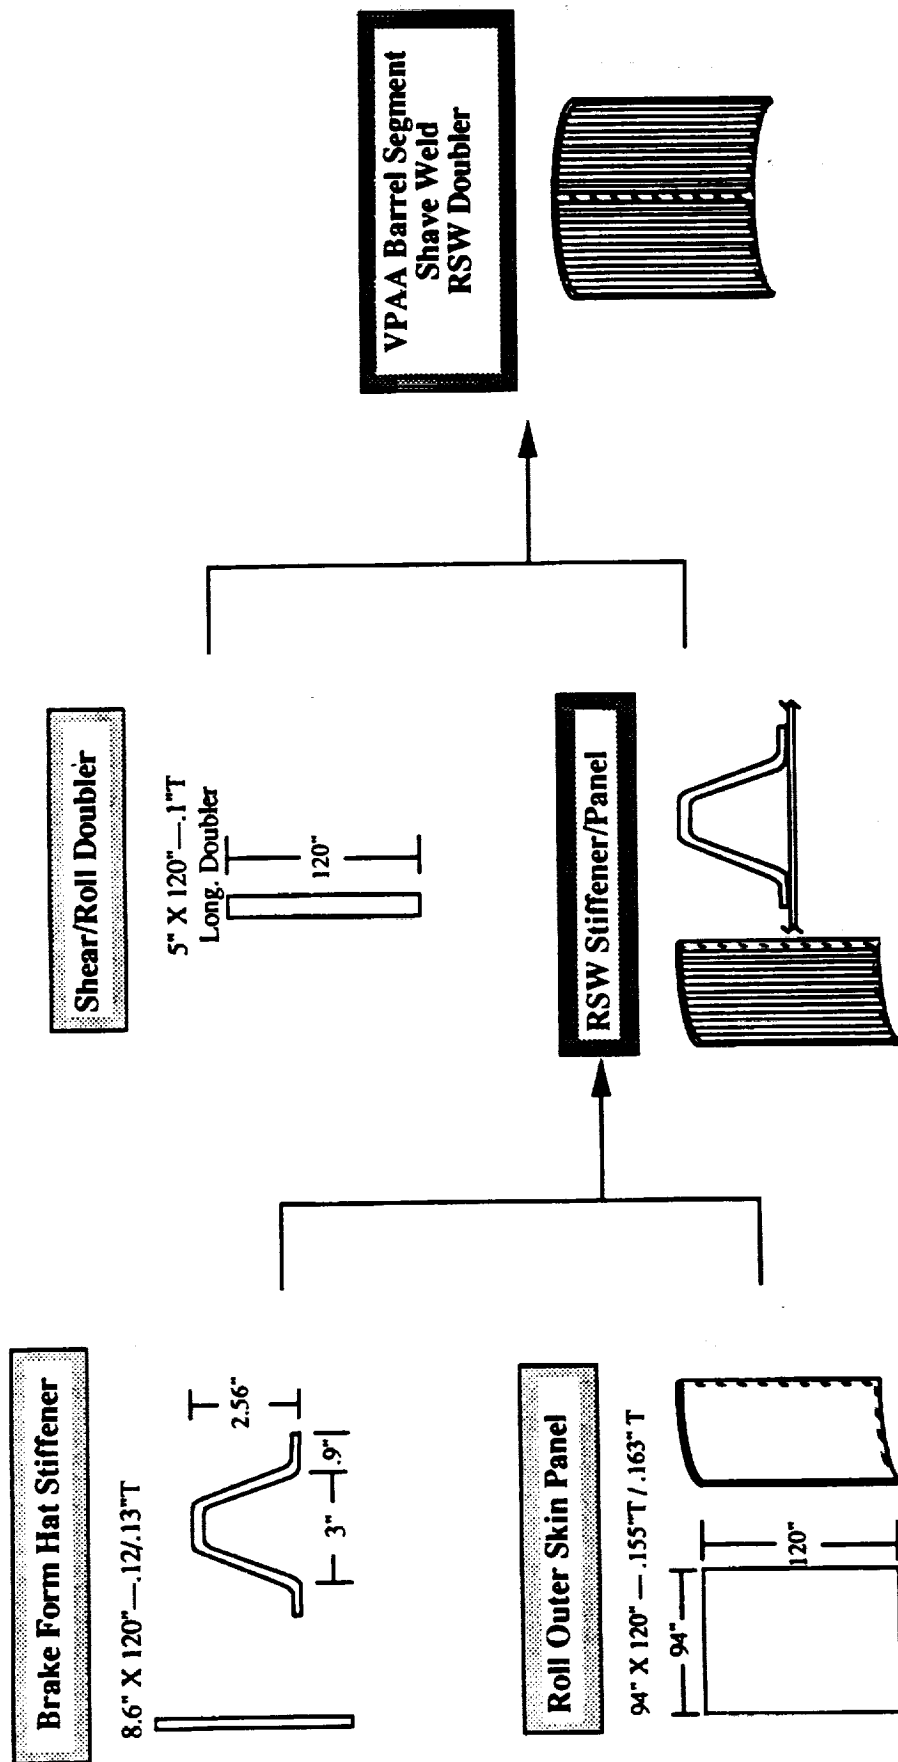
Manufacturing Process Flow for 2090 Al-Li or 2219 Al Brake Formed Stiffener Components and Assembly Into Barrel Sections.
